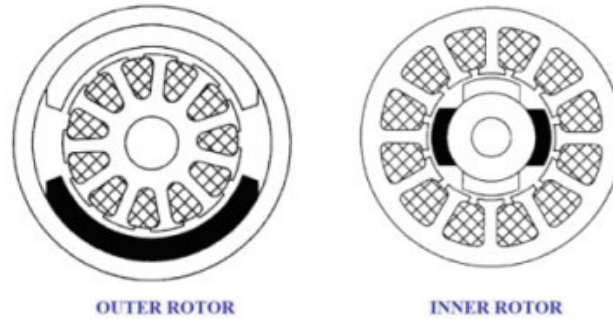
Comparison between Inner Rotor and Outer Rotor motors [6]
